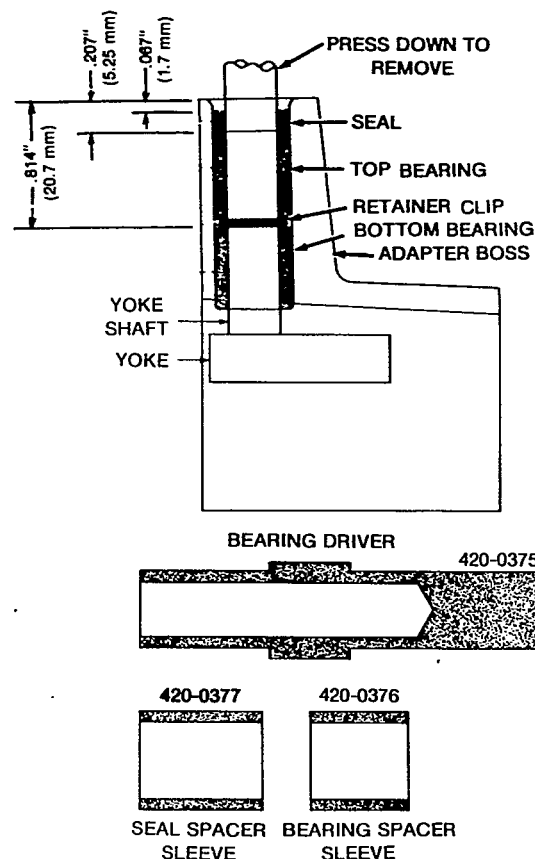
BEARING INSTALLATION AND TOOL PACKAGE (420-0374)
